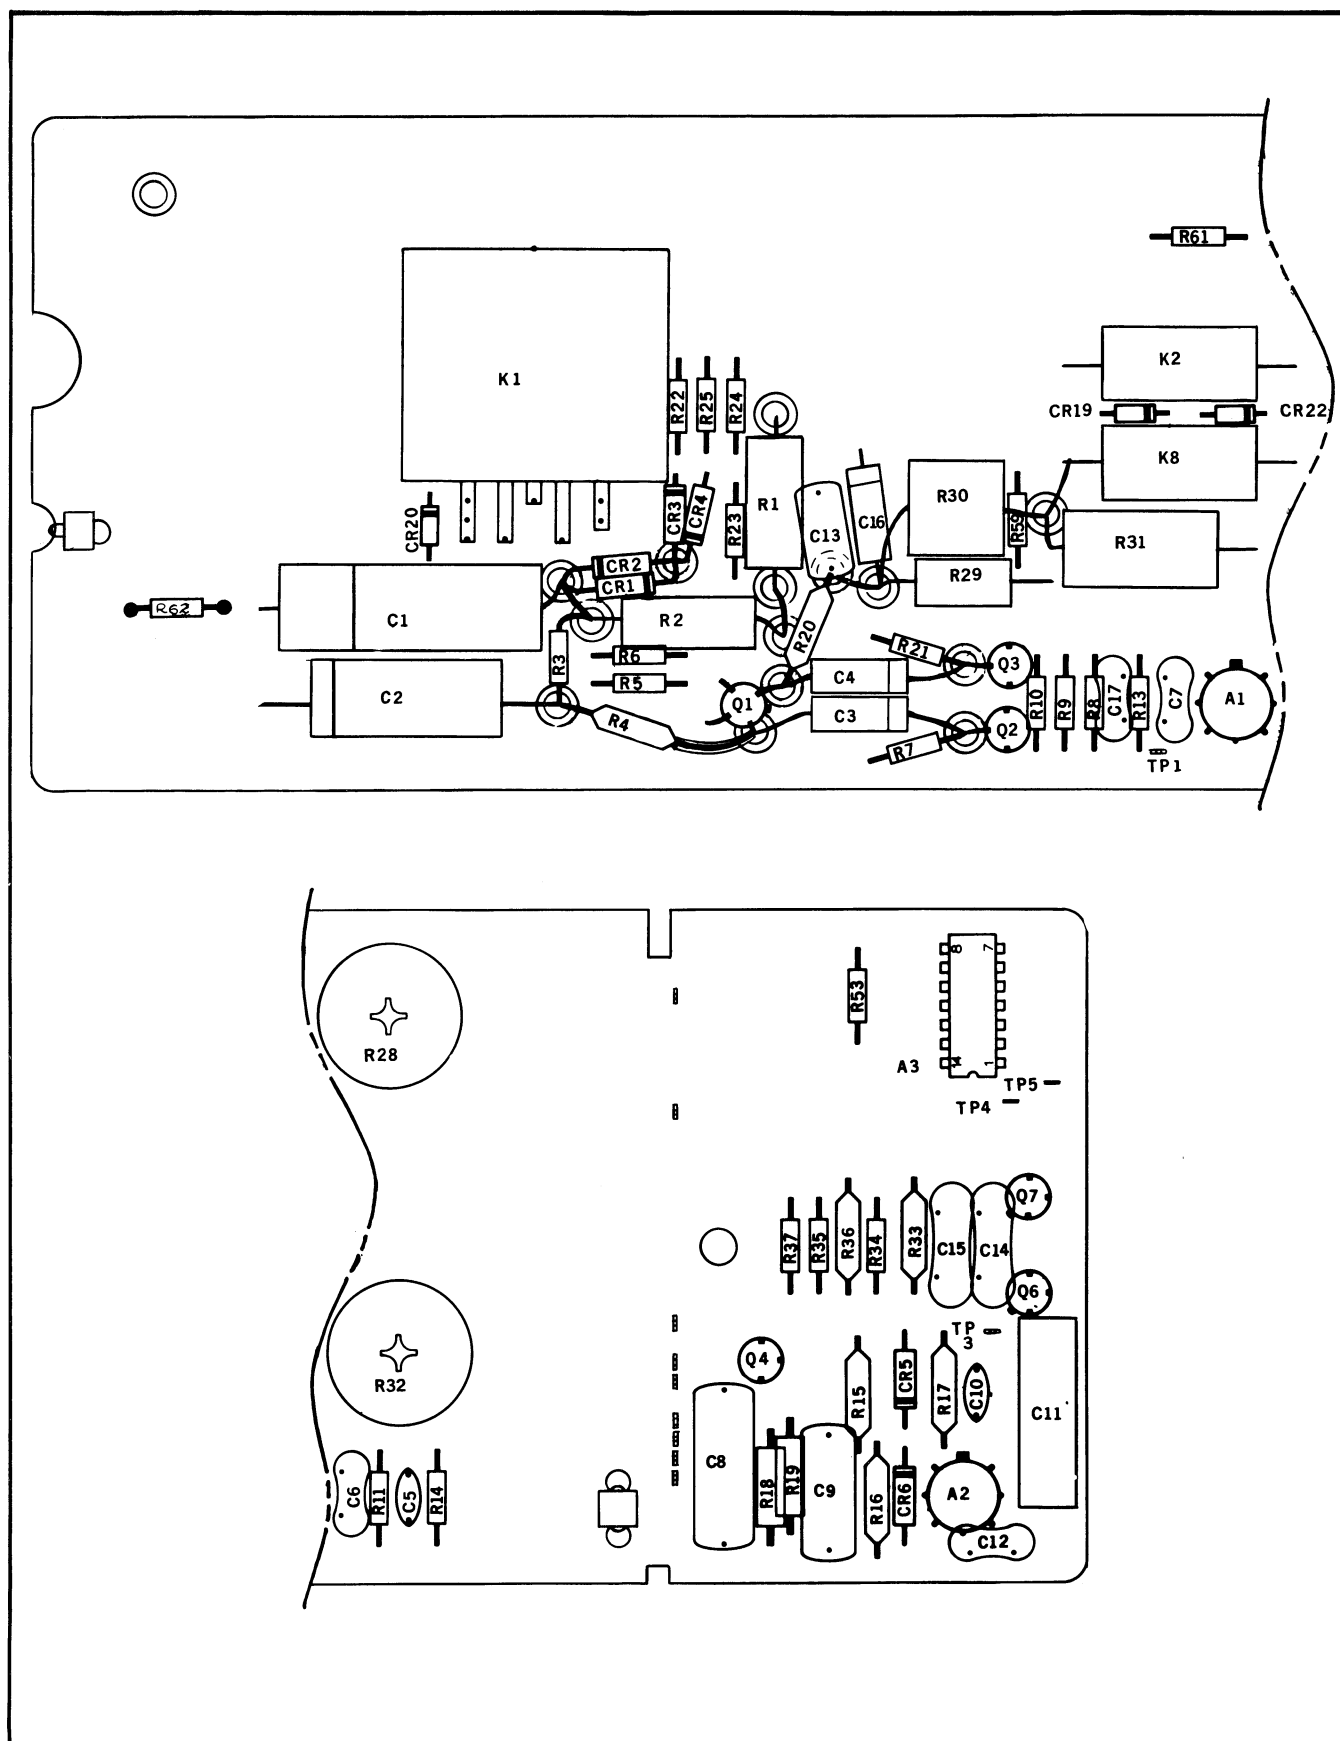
MILLIVOLT CONVERTER P/C ASSEMBLY
